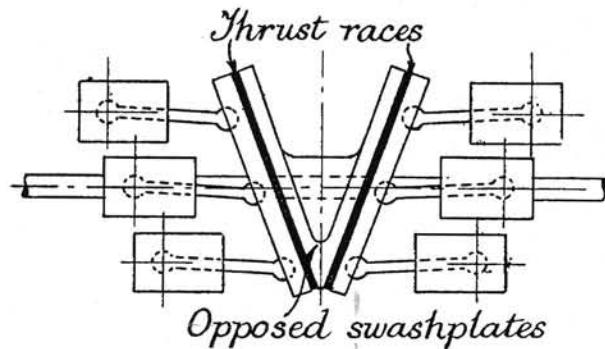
Swashplate systems arranged in opposition to balance out end thrust on shaft.
